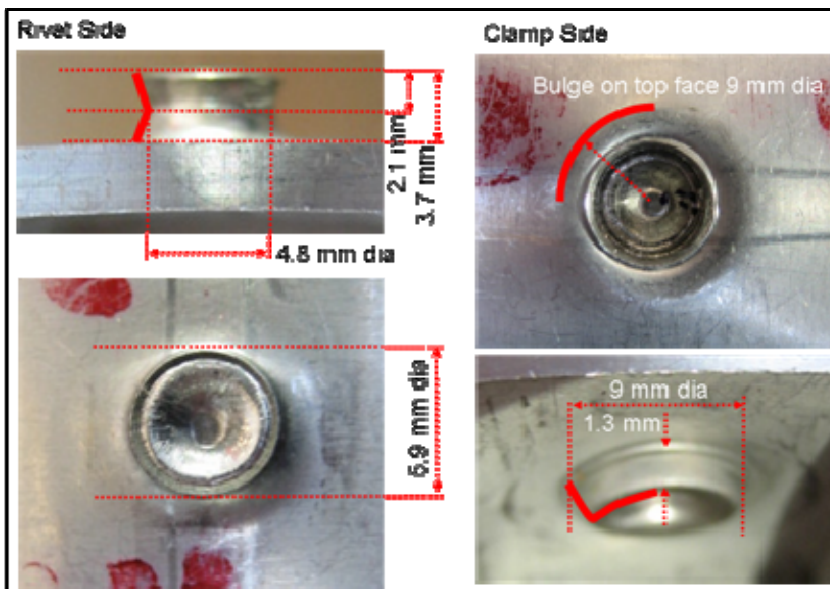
Rivet geometry of u-tension specimen measured after testing
